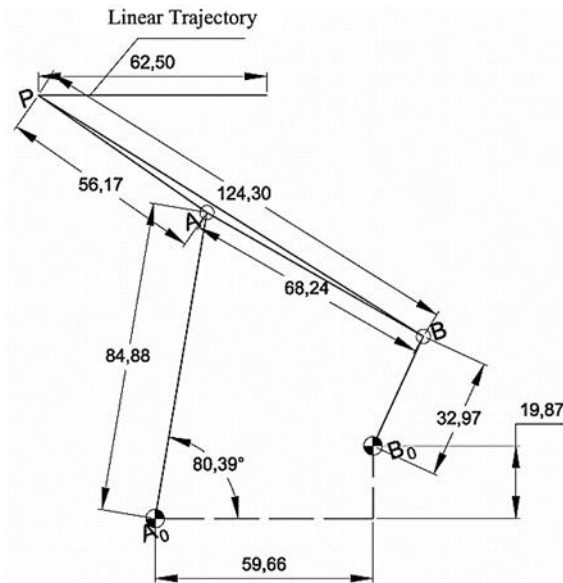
Kinematic dimensions of four-bar mechanism generating trajectory
